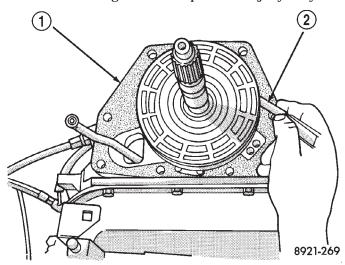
Trimming Overdrive Case Gasket 1 – GASKET
